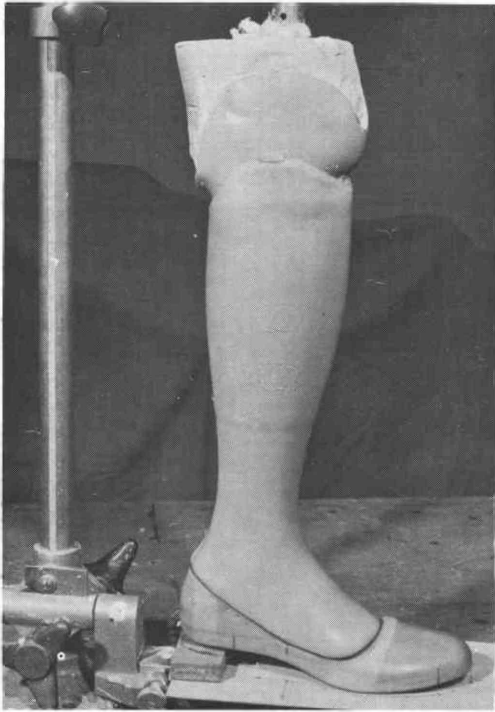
Calf section tack welded to socket in vertical transfer jig.
